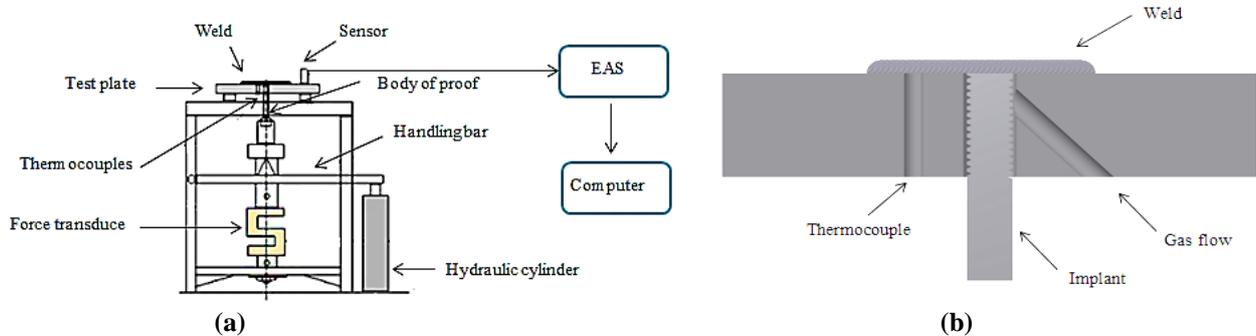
(a) Implant equipment test LTPSolda/DMM/IFMA. b) Test plate for tests using purge gas.
